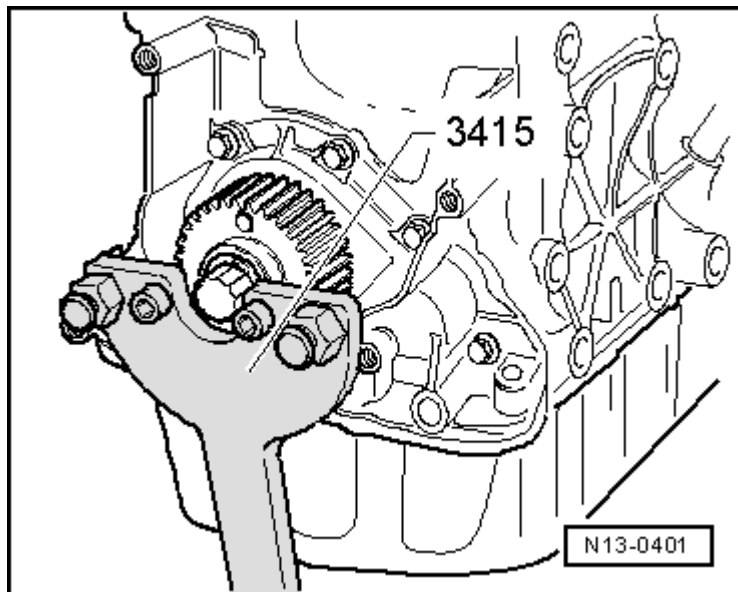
Identifying Counter-Hold 3415 On Crankshaft Toothed Belt Sprocket
